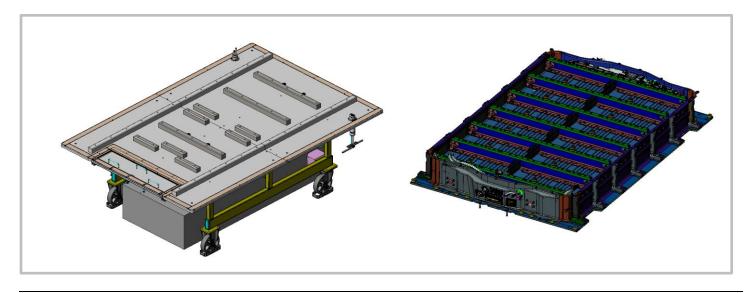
Automated Guided Cart and a 24 Module Long Wheelbase Battery Assembly
